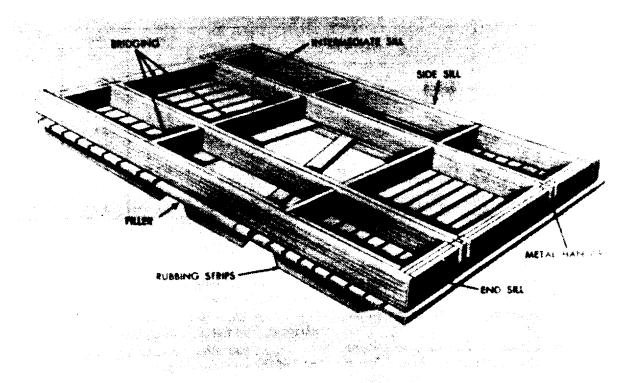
Assembly details for bolted crates (MIL-C-3774).
